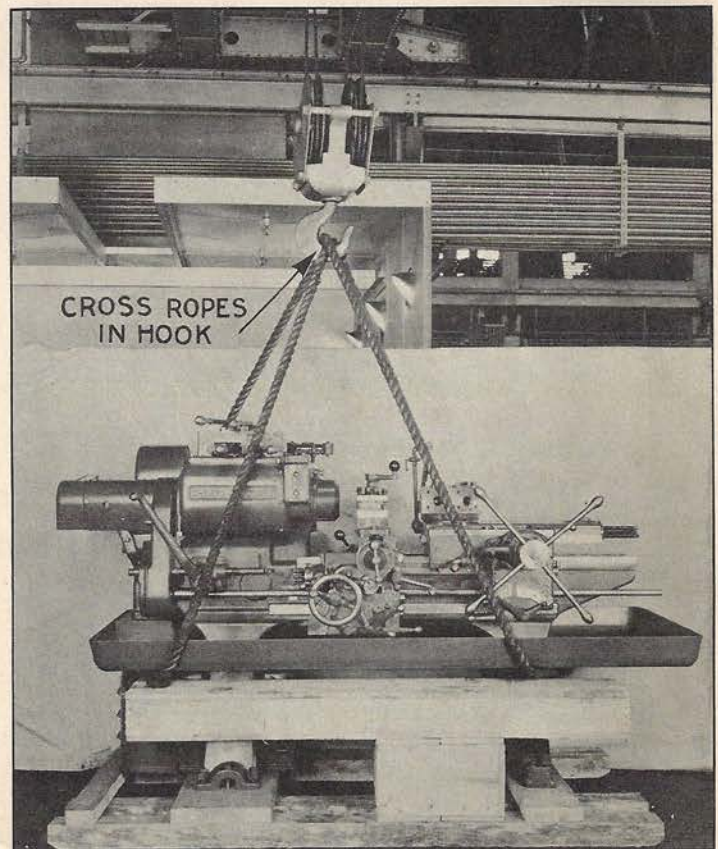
Proper Method of Lifting Turret Lathe with Crane
